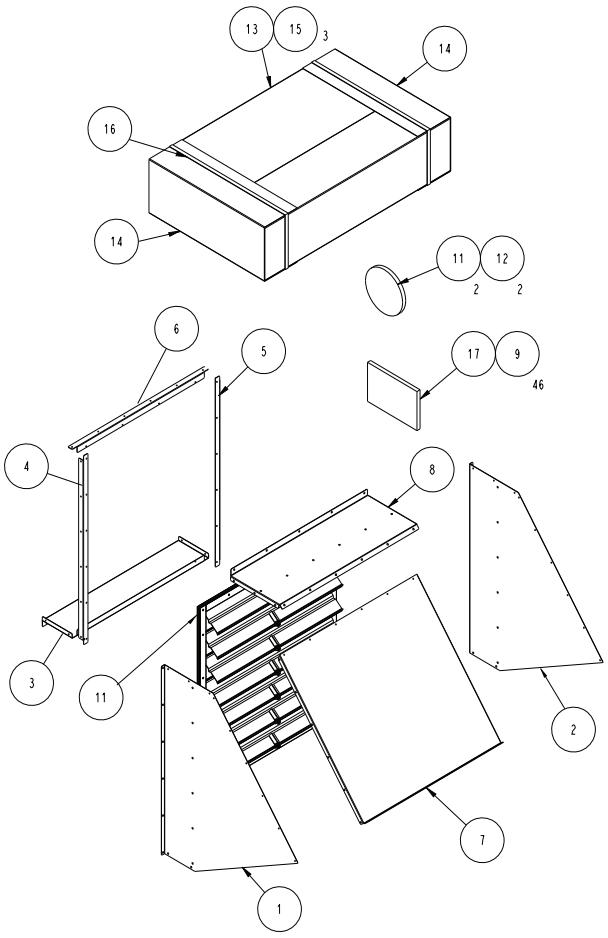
Exhaust Hood Assembly and Parts Detail
